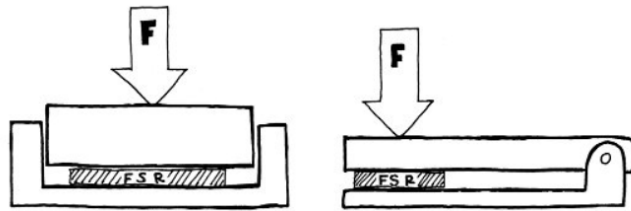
Joints for constraining shear forces: a grooved sliding joint (left) and a hinge joint (right), source [41].
